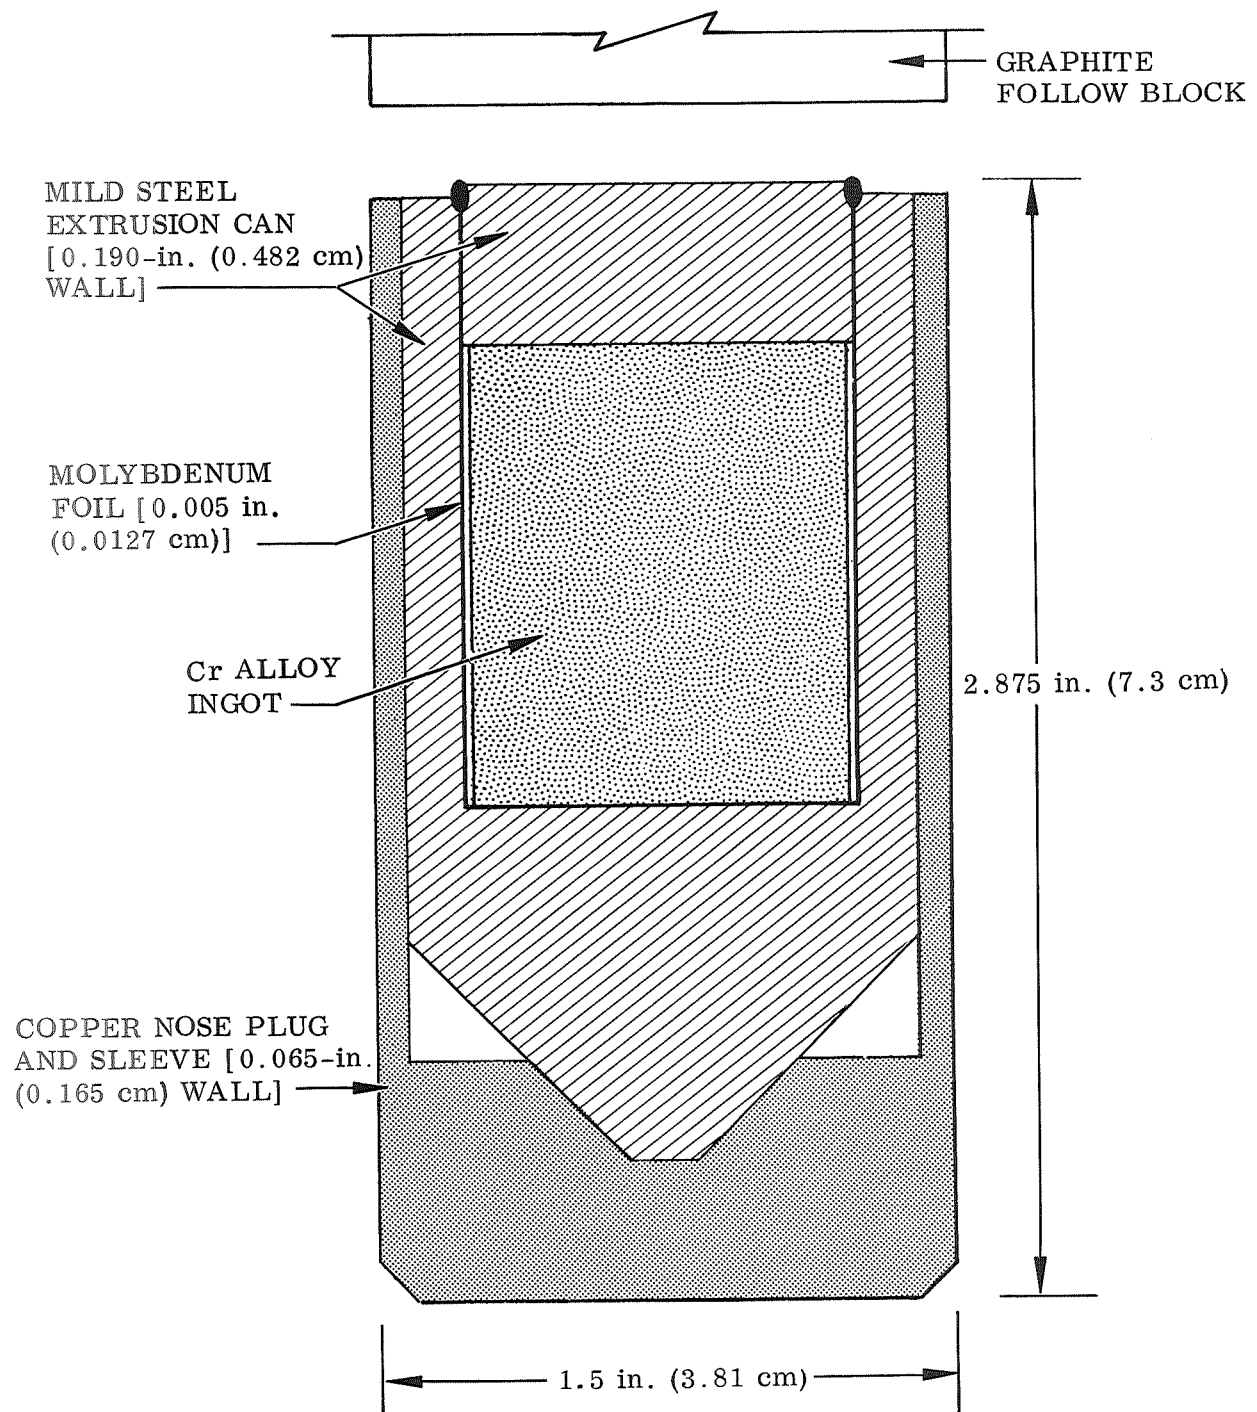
Extrusion Billet Configuration – Longitudinal Section Through Center (×2).
